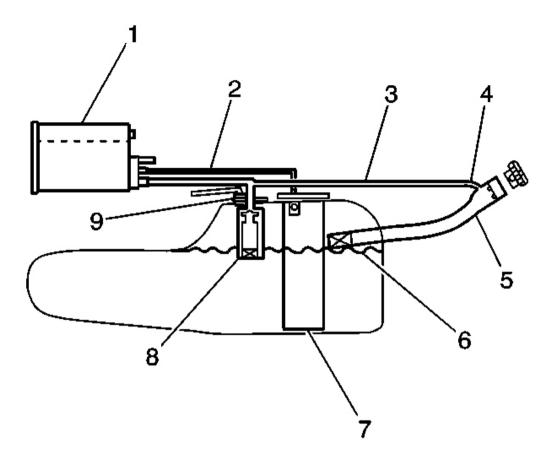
View Of On-Board Refueling Vapor Recovery System (ORVR) Courtesy of GENERAL MOTORS CORP.
